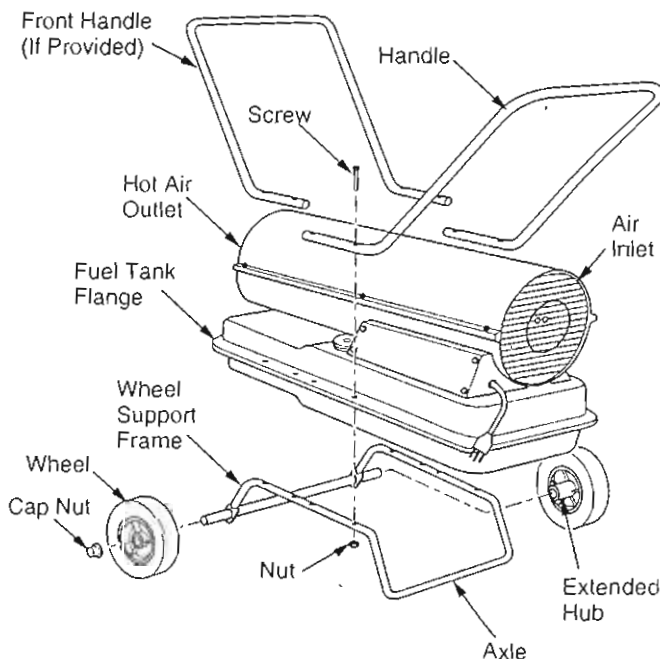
Wheel and Handle Assembly, 110/115/155/165/200 Models Only
